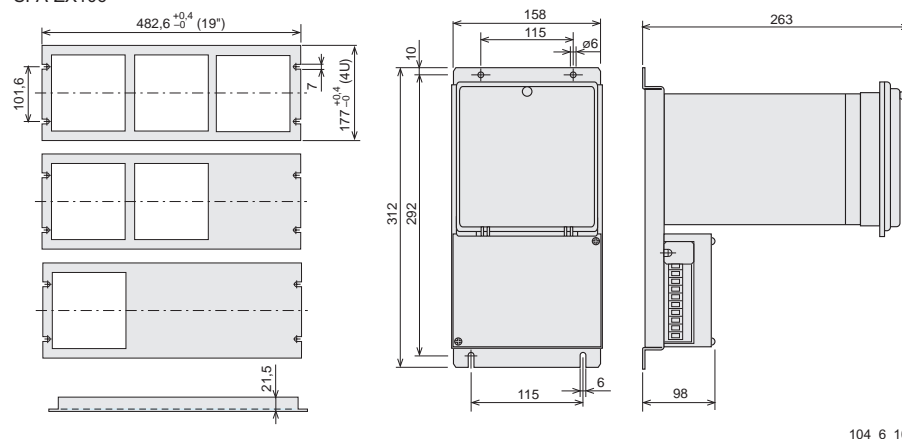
Semi-flush mounting relay case (dimensions in mm)
